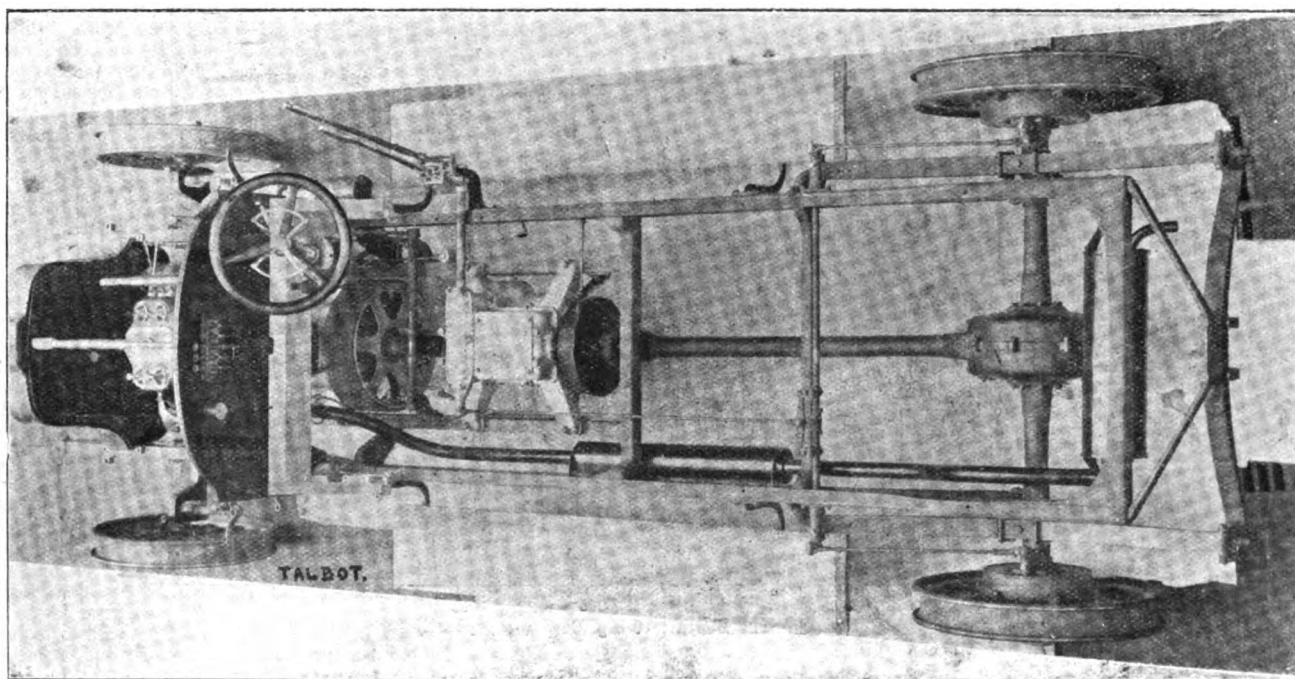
Plan of Chassis of Talbot 35-h.p. Car.
